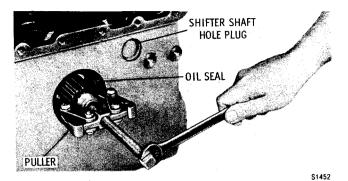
Removing output shaft front oil seal (-1 models with one-piece output shaft)
